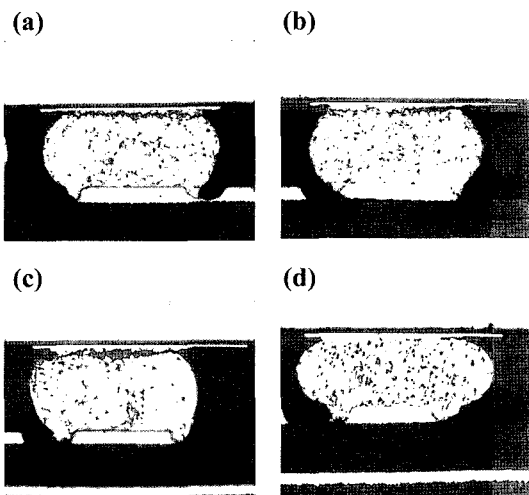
Cross sectional views of solder joint after failure of (a) sample A, (b) sample B, (c) sample C and (d) sample D with Hynix ball configuration.
